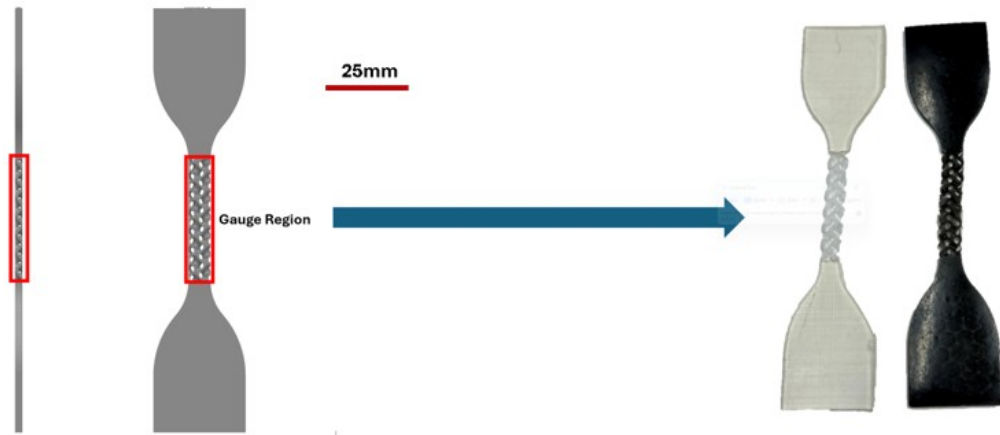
(i) CAD design of the gyroid tensile specimen showing the highlighted gauge region containing the lattice structure, and (ii) fabricated specimens produced using Flexible 80A and Silicone 40A resins.
